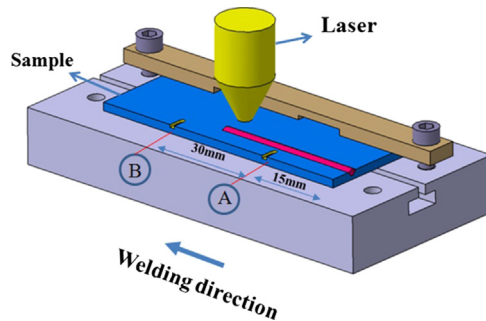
A schematic illustration of the laser welding experiment.
